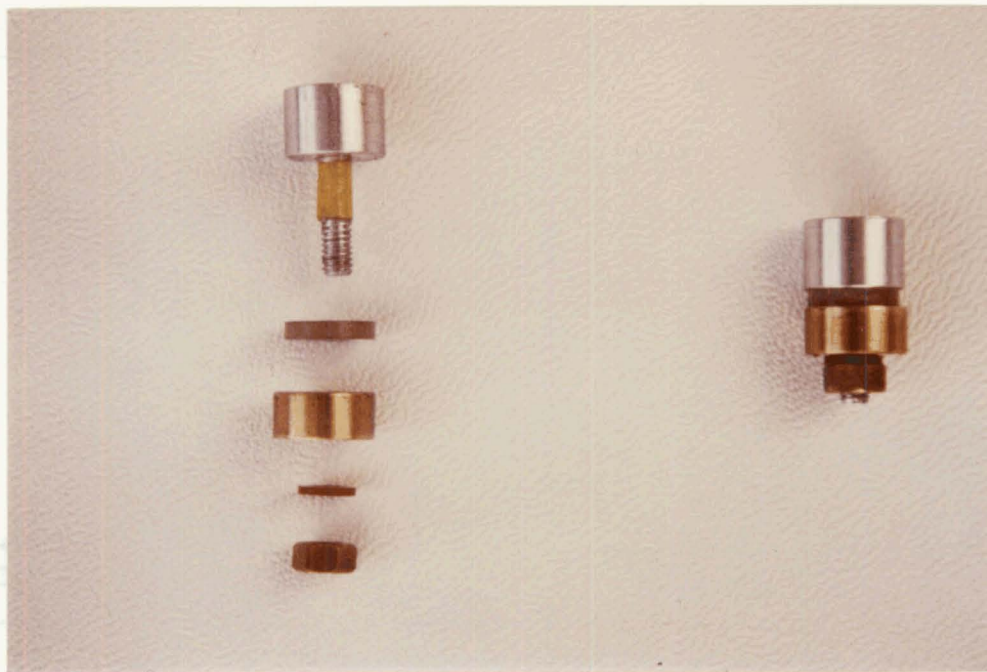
Photograph of transducer elements with integral bolt showing from the top: aluminium front section with shaft; piezoelectric ceramic; brass rear section; washer; and nut.
